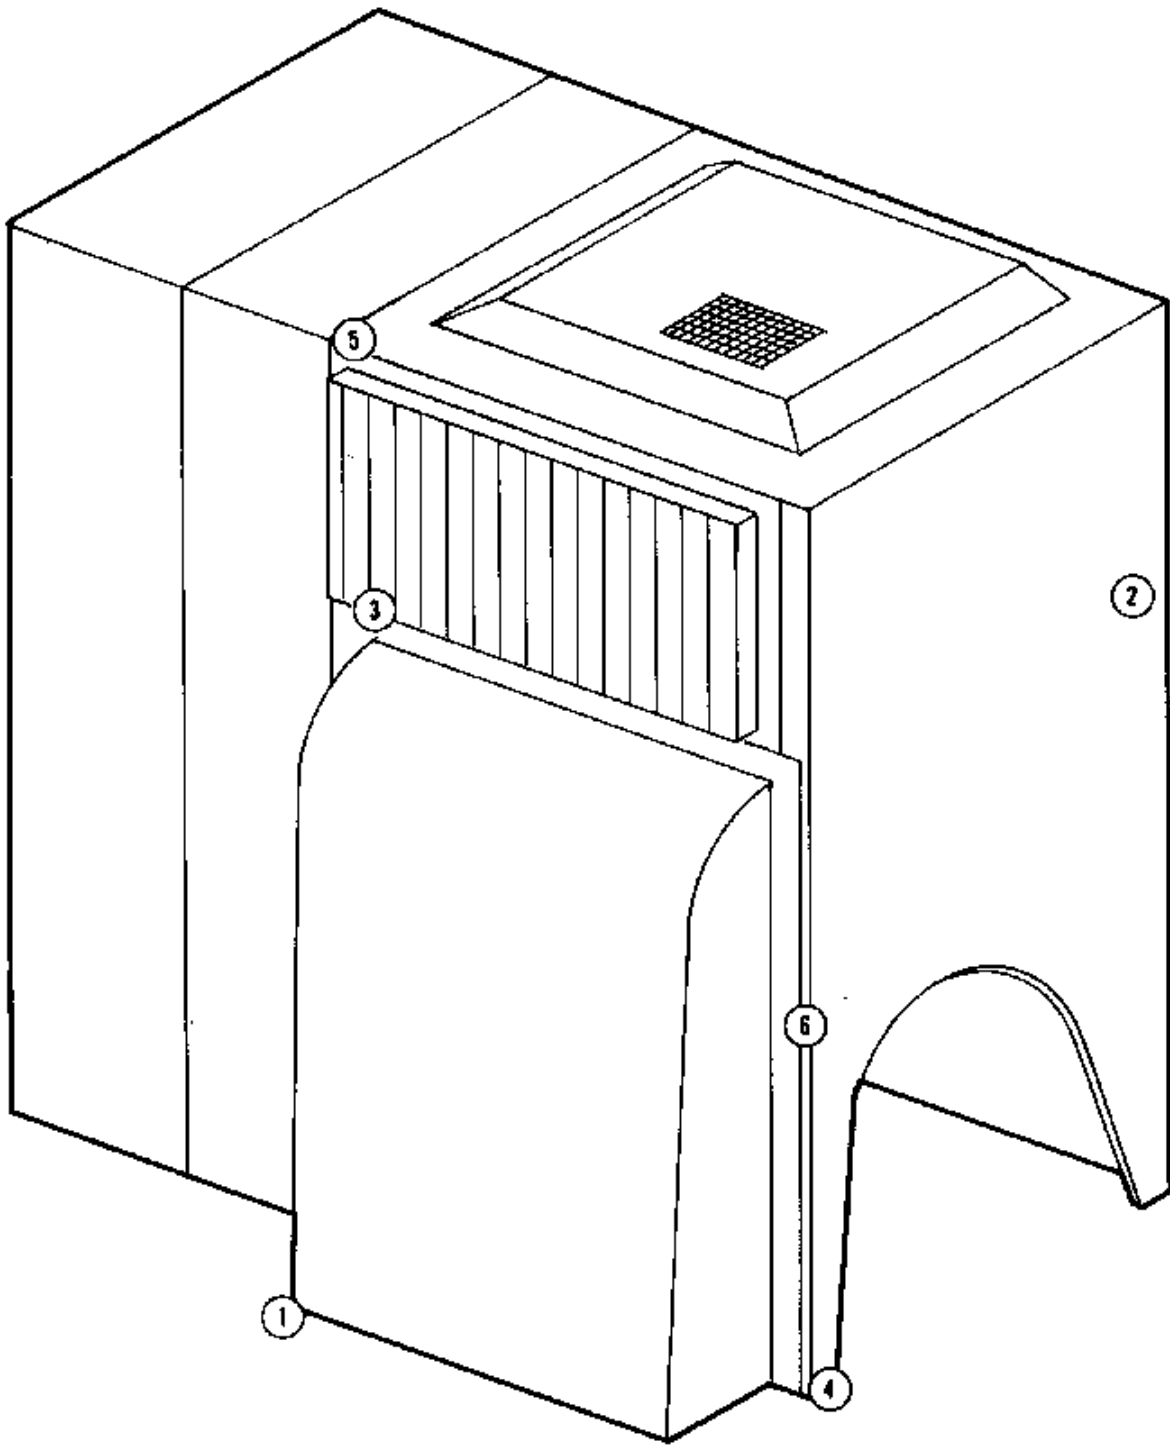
Electrical Cabinet Engineerroom Side Removable Panels
